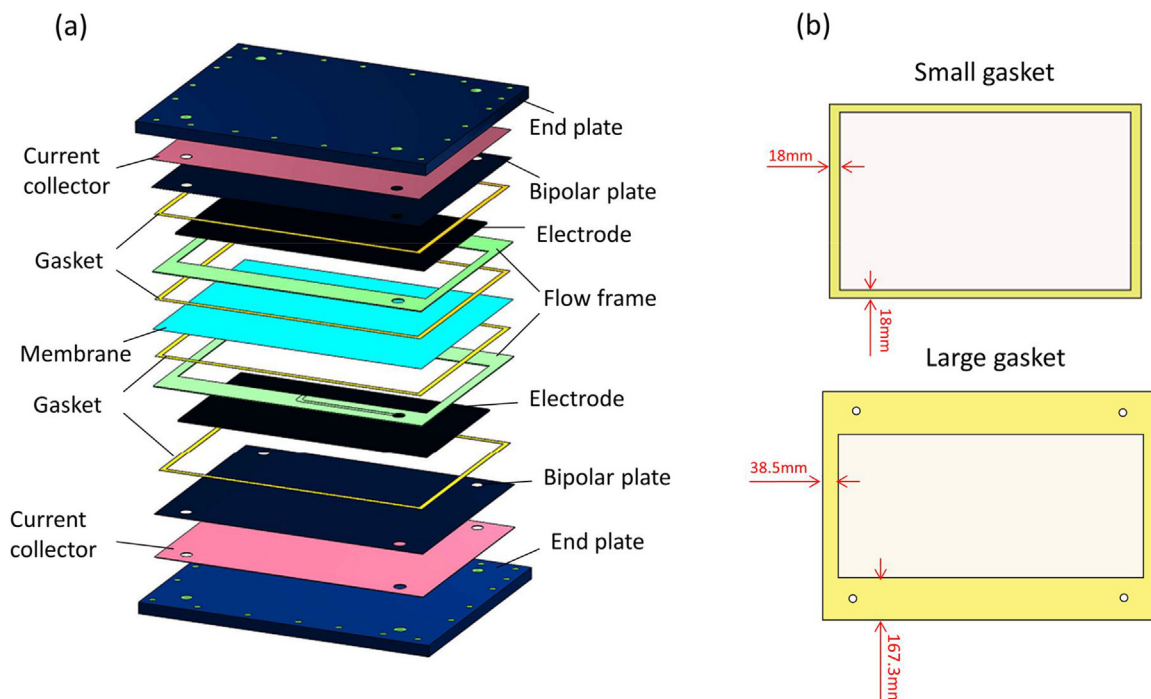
(a) Single cell assembly components (b) Illustration of small and large gasket designs.
